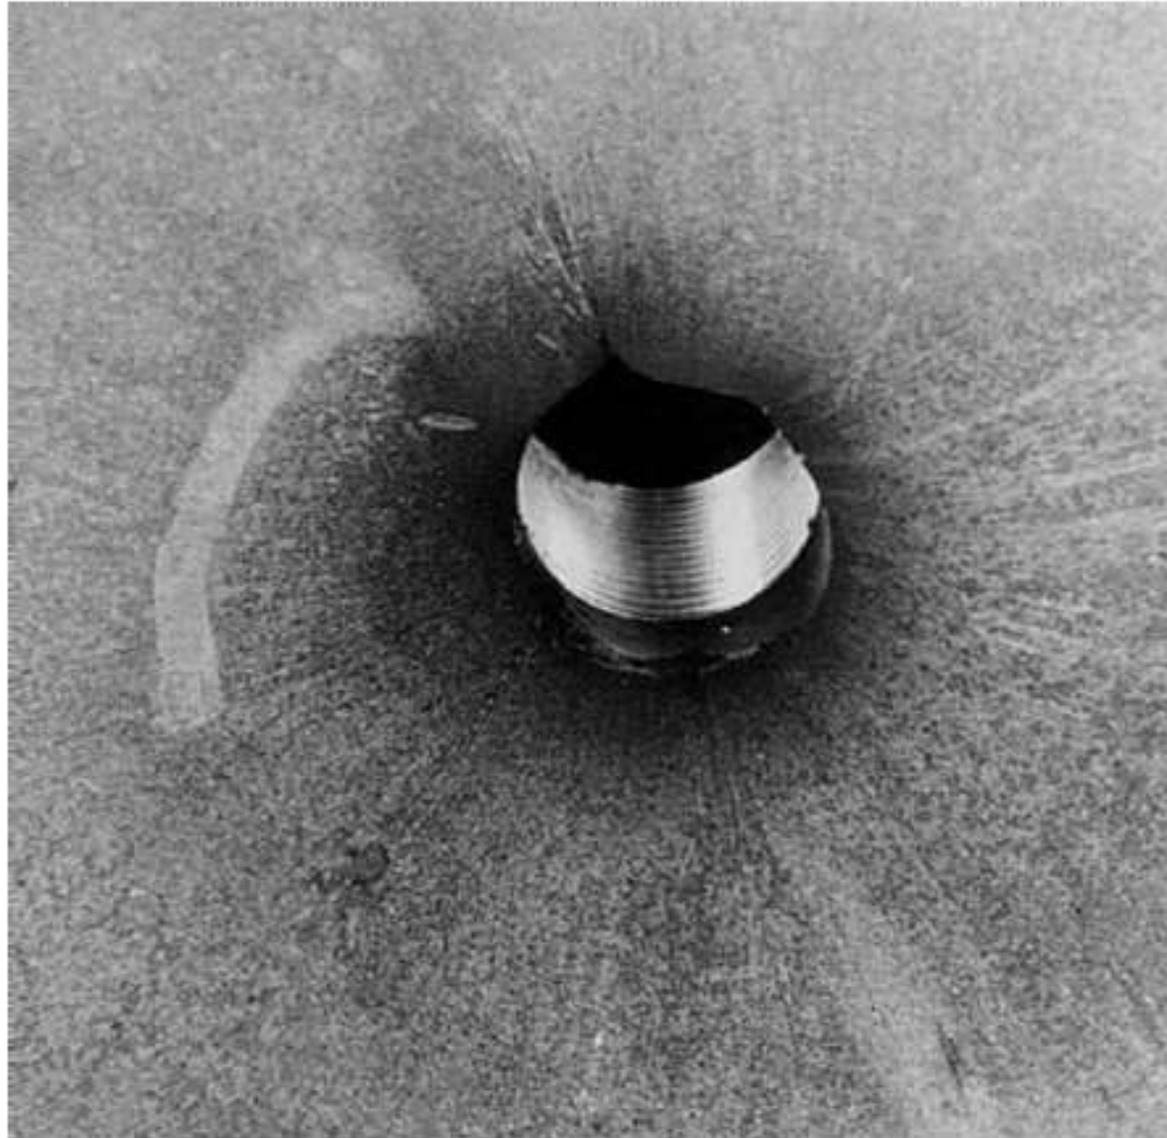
Fold near the thread region. Mirror view shows clearly that the fold does not enter into the full-thread area. This type of fold is acceptable if the depth of the fold is estimated to be less than 0.060 inch (1.53 mm).
